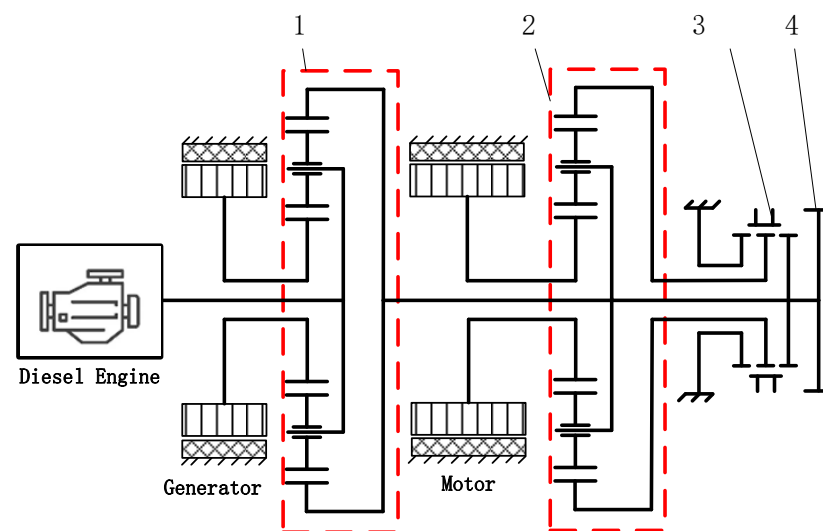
Two-gear power-split hybrid system. 1—Coupling mechanism. 2—Motor deceleration mechanism. 3—Two-gear AMT shift mechanism. 4—Main reducer input gear.
